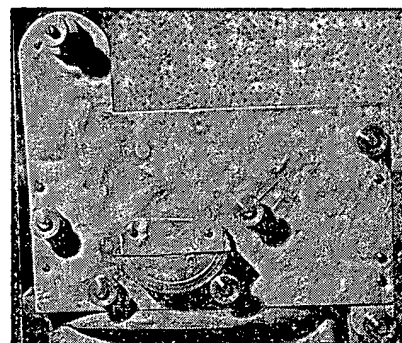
Plate with rollers mounted on it. The guide roller of the tape is inside the cement holder.
